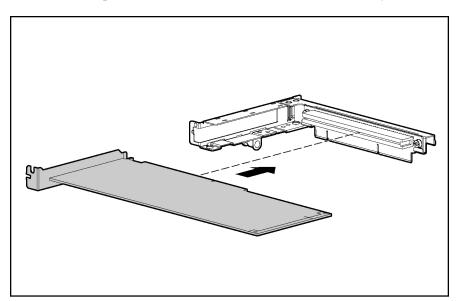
Installing an expansion board into the PCI riser board assembly
